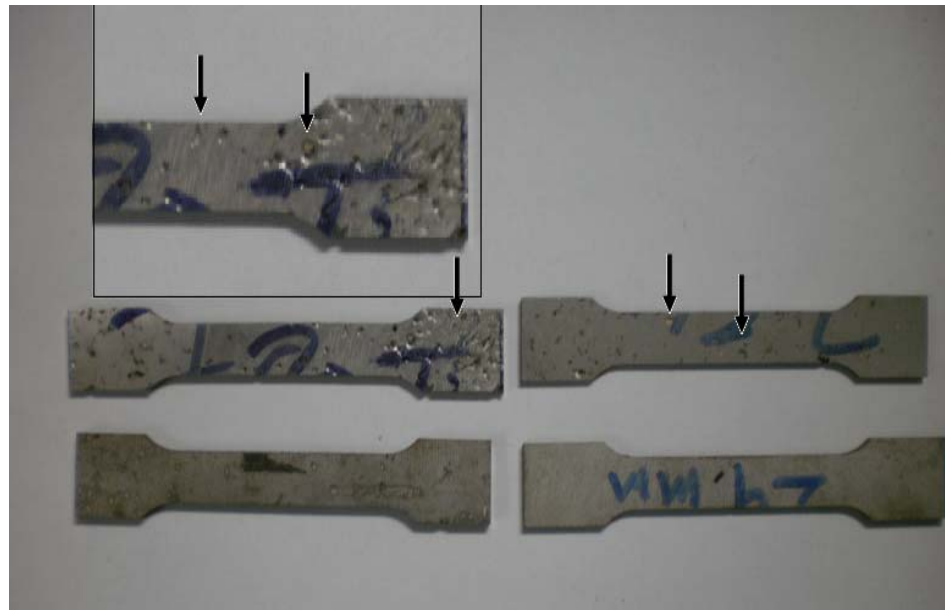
Some of the defects observed in the castings (gas porosity, penetrate of coating into the metal and shrinkage)
